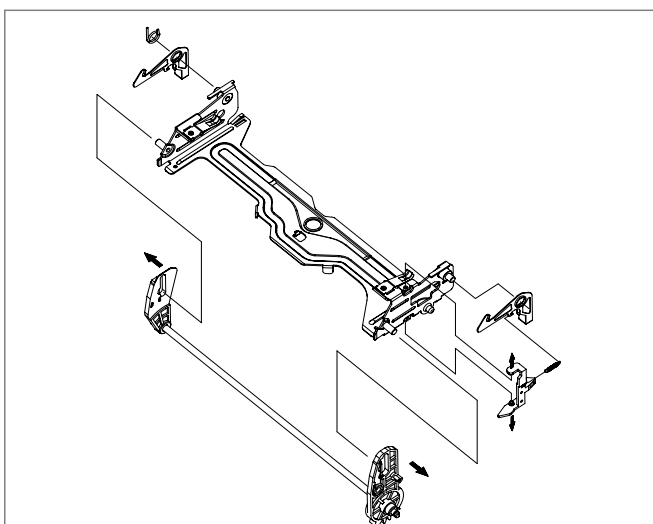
Disassembly of the CASSETTE HOLDER Ass'y
